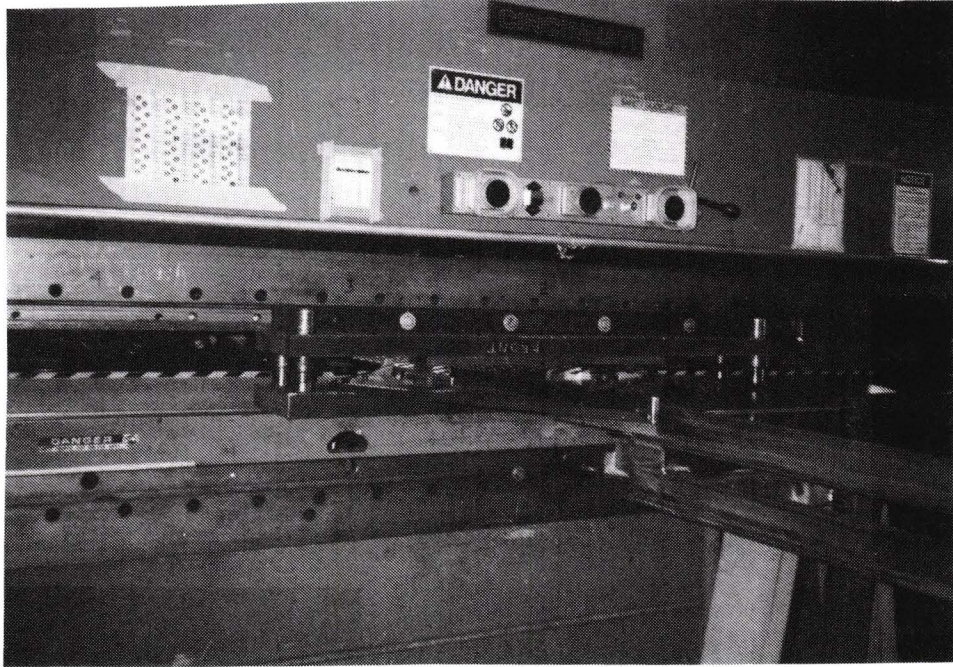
PRESS USED TO STAMP SHEET METAL TO MAKE AMS STRIP
